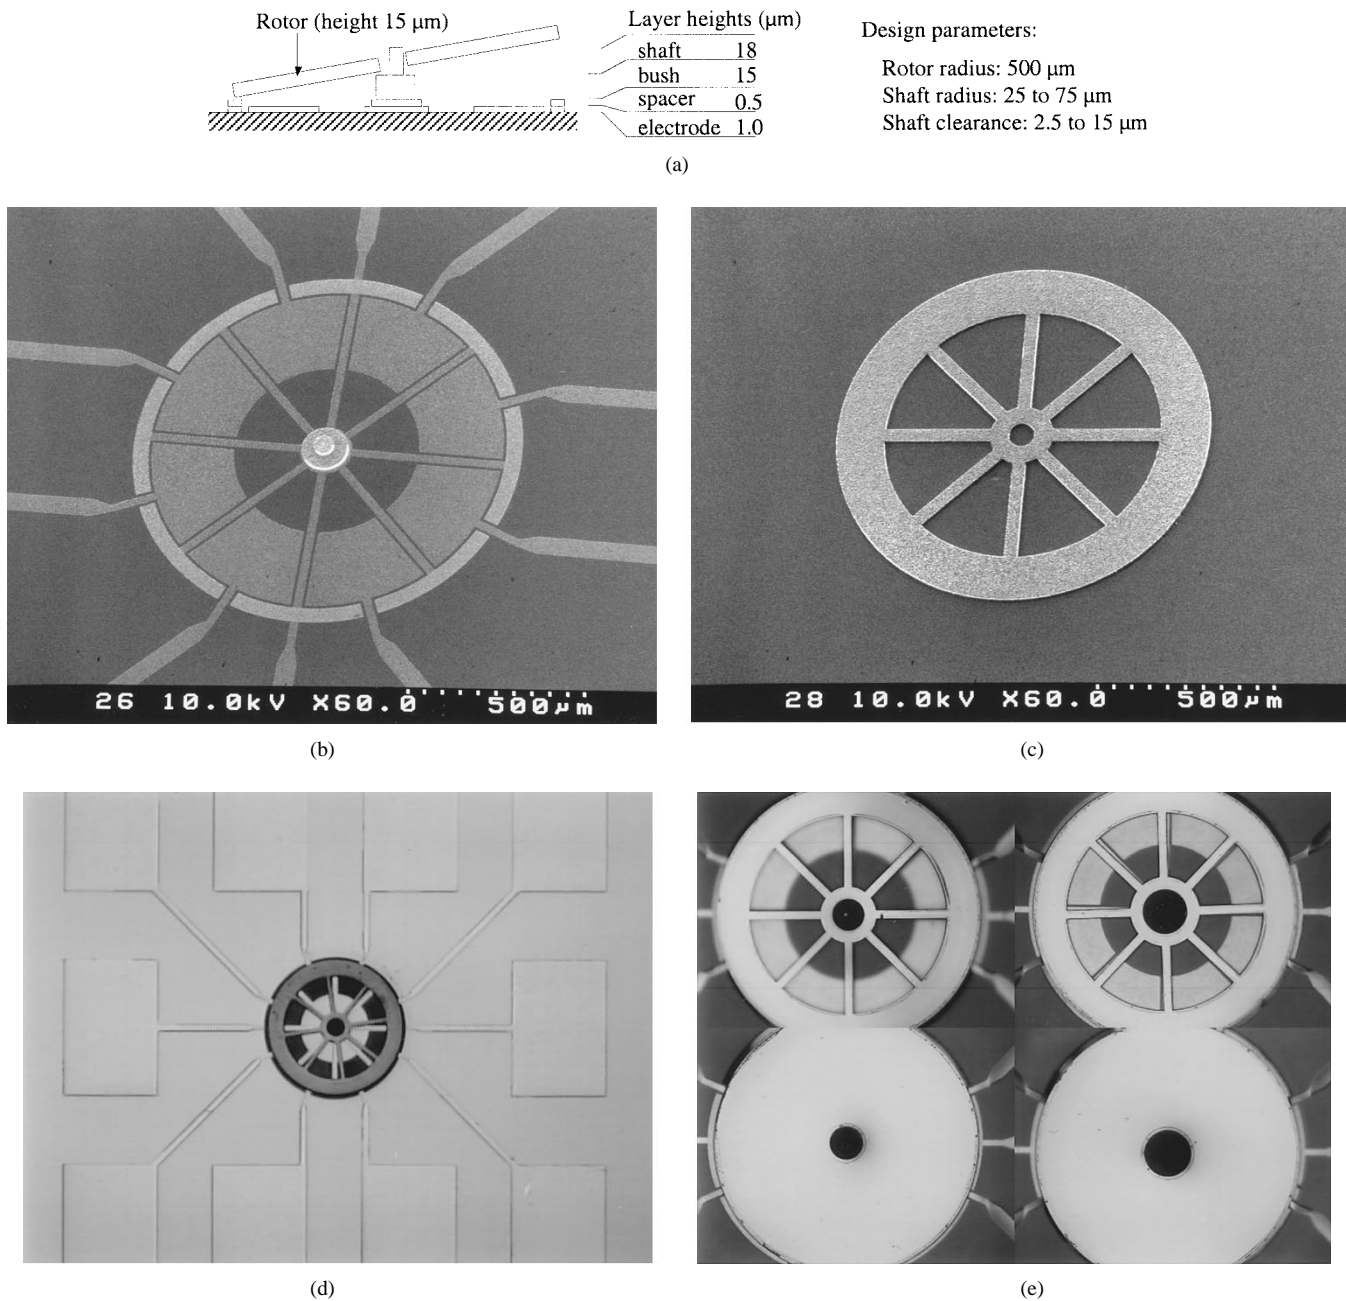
Laser-assembled wobble motor. (a) Structure and design parameters. (b) and (c) SEM images of stator and rotor prior to assembly. (d) Single laser-assembled device. (e) Four devices of different designs from an array of 16 laser-assembled by step-and-repeat with a single alignment operation.
